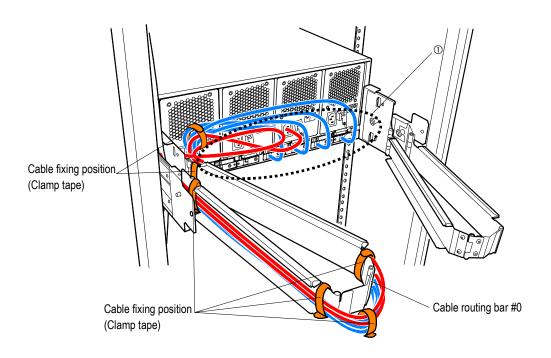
Fixing the ENC Cable #A0, #A1 and Power Cable #B0, #A0 (for Rev.B or later)
